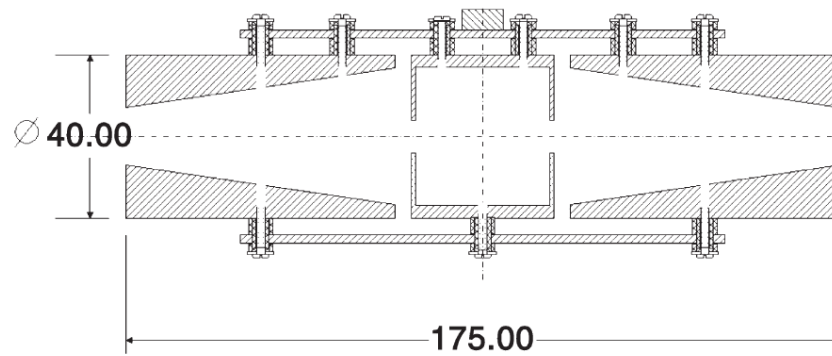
The geometry of ConeTrap (dimensions in mm) [28].
